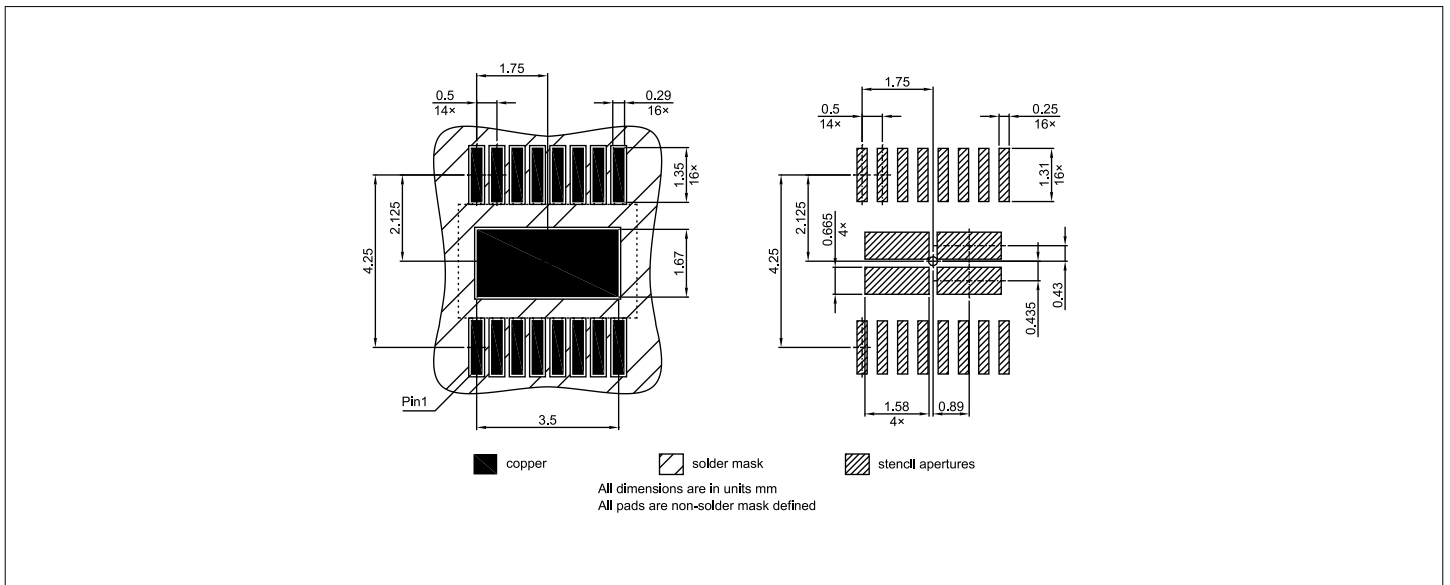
PG-TFDSO-16 dual small outline footprint dimensions
